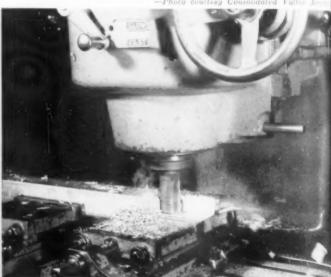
(bottom left) Roughing 75 ST spar cap extrusion on 60 ft., 35 hp spar mill using 8% by 3-inch four-flute 25 deg helical carbide cutter. Cut is 7/16 by 2% inches in depth, feed 300 ipm at 3600 rpm. With the surface speed of 1570 fpm a finish exceeding 100 microinches is obtained.
